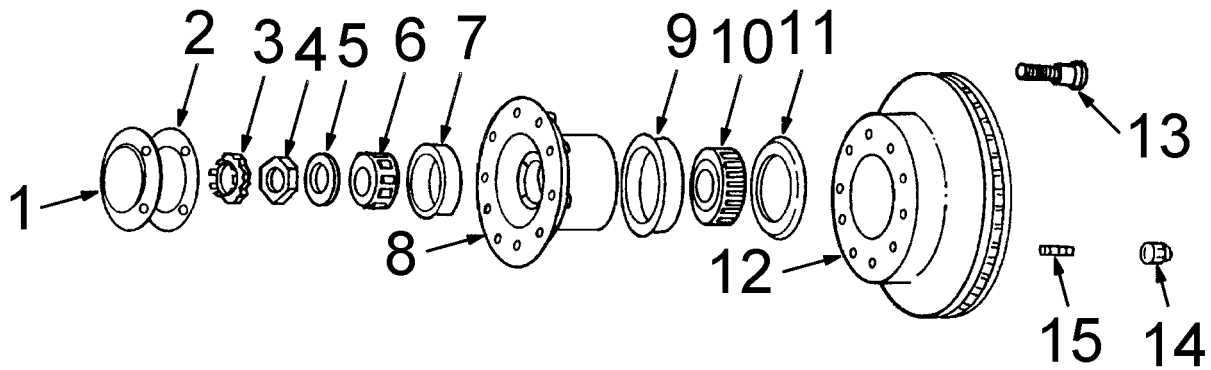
Remove Front Rotor And Wheel Hub Assembly
